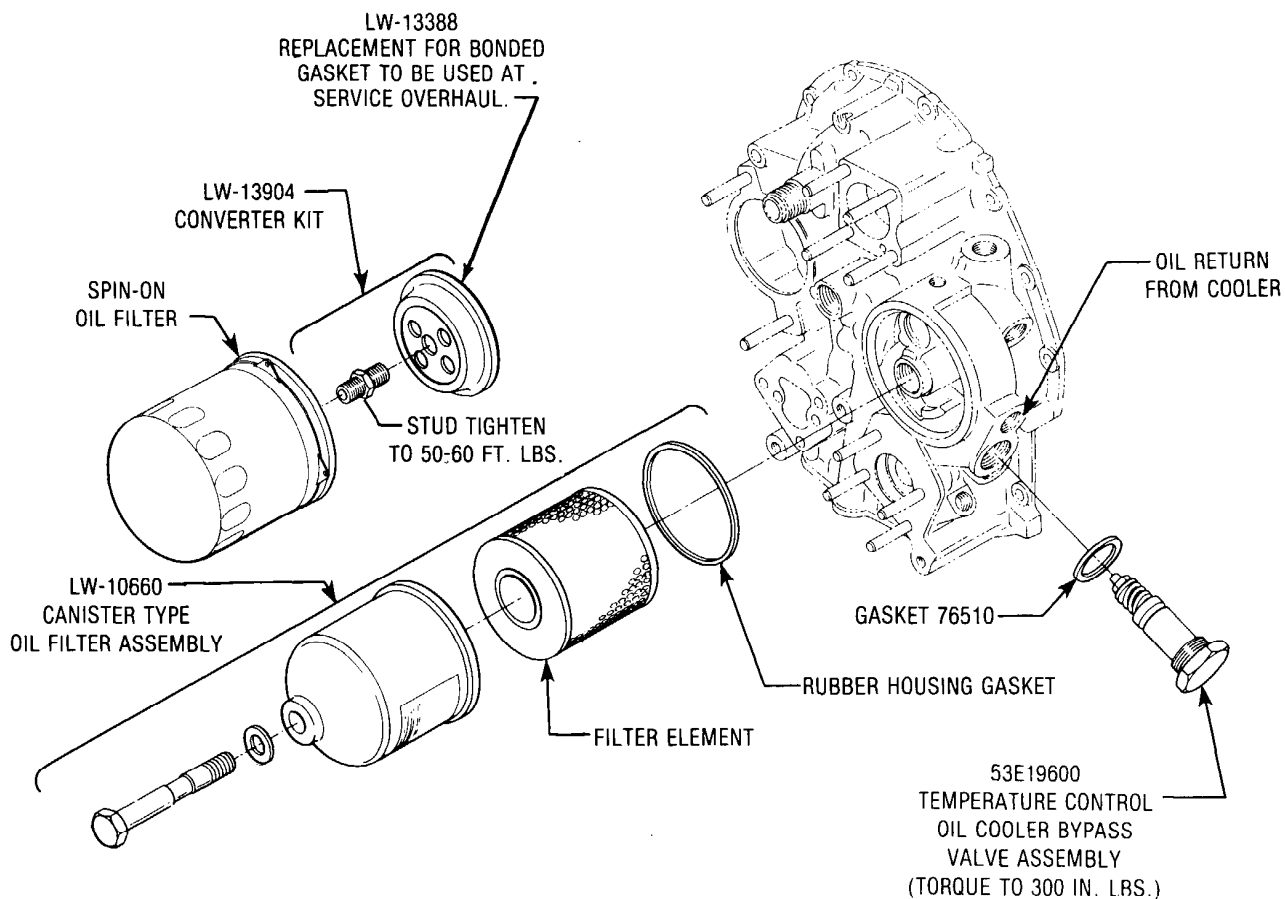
Exploded View of Full-Flow Oil Filter Assembly - Dual Magneto Engines
